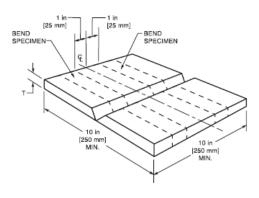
Alternative Groove Weld Qualification Test Plate— All Thicknesses (see 3.19.2)
